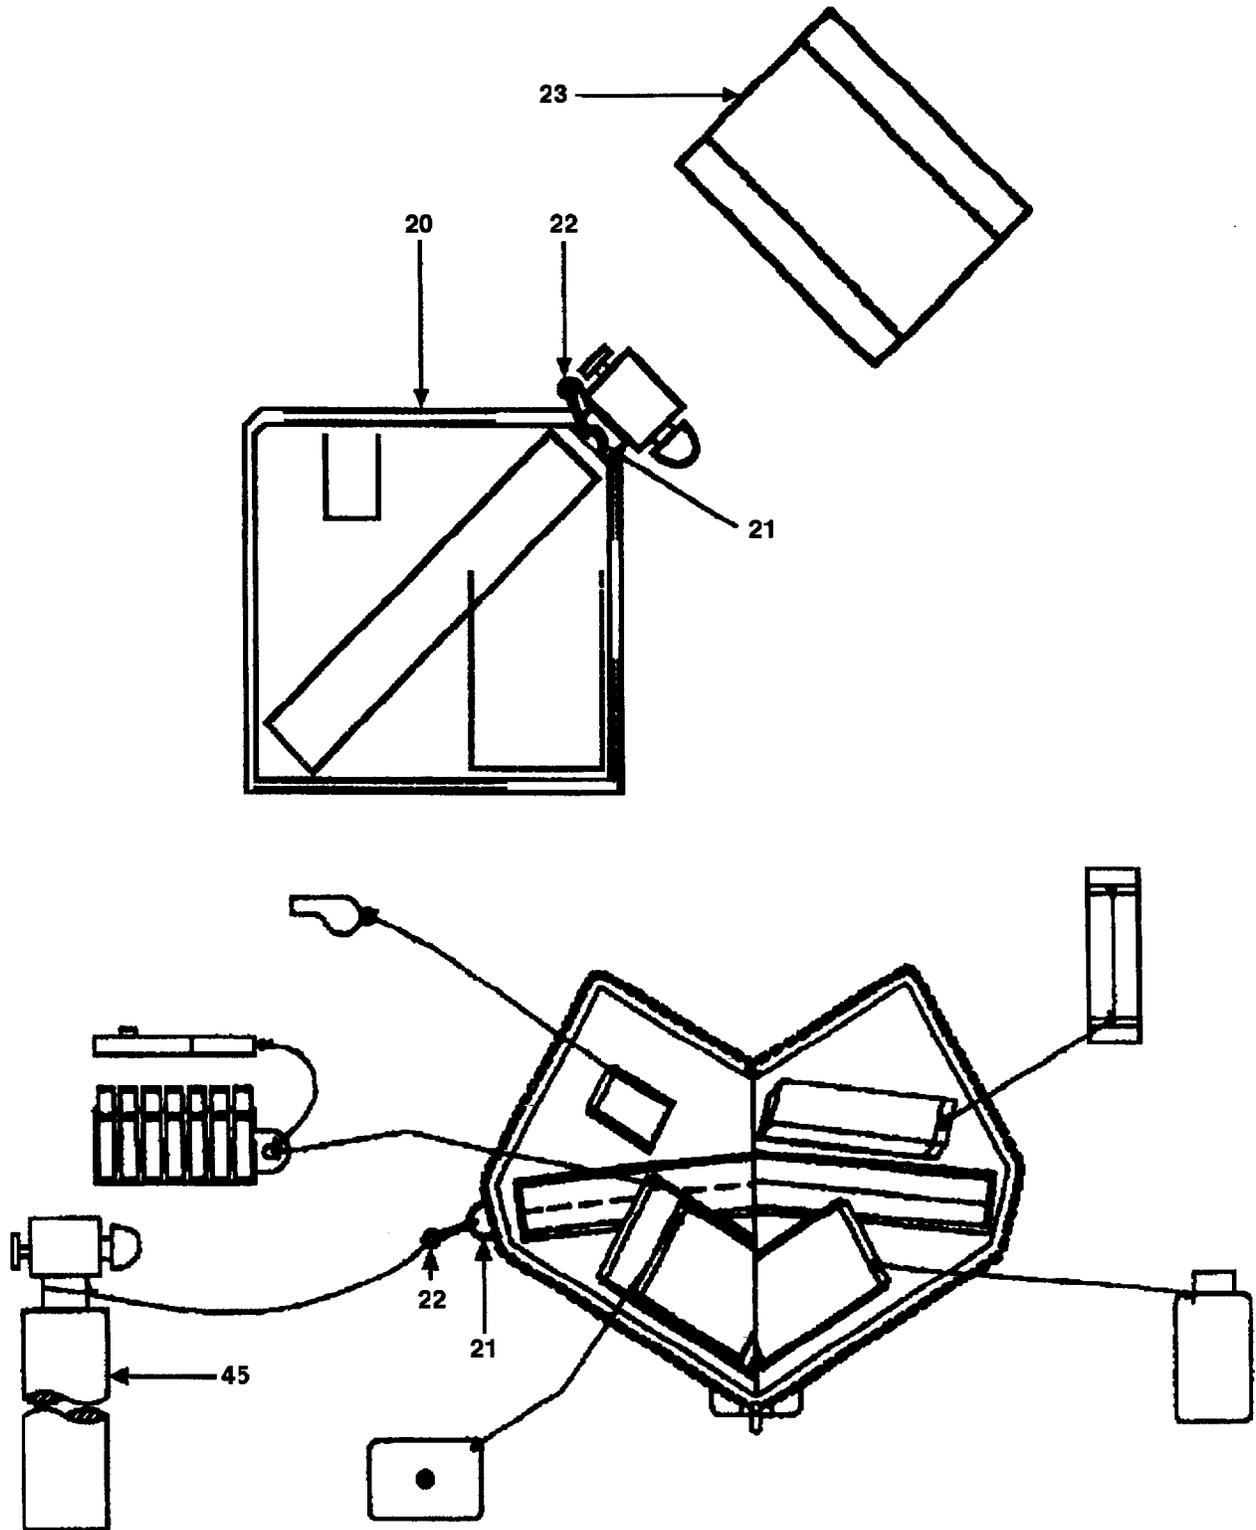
PCU-33/P Parachute Restraint Harness Assembly (Sheet 11 of 11)
